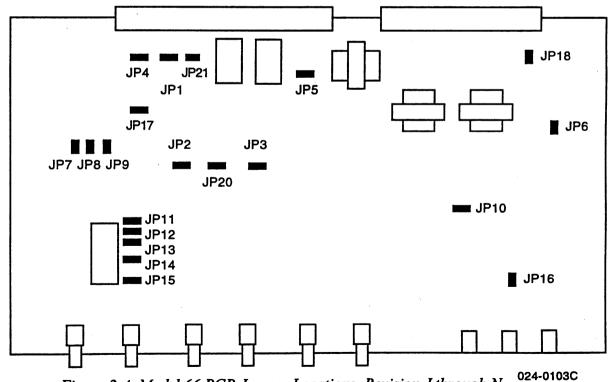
Model 66 PCB Jumper Locations, Revision J through N
